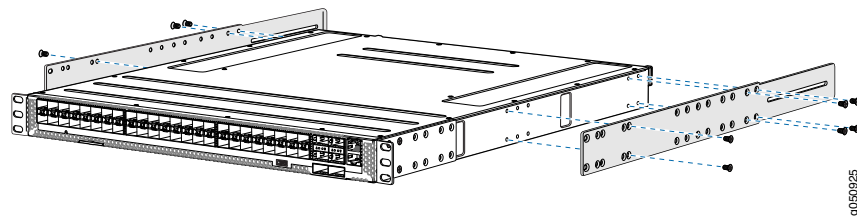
Align the Front Mounting Bracket and Secure with Screws
